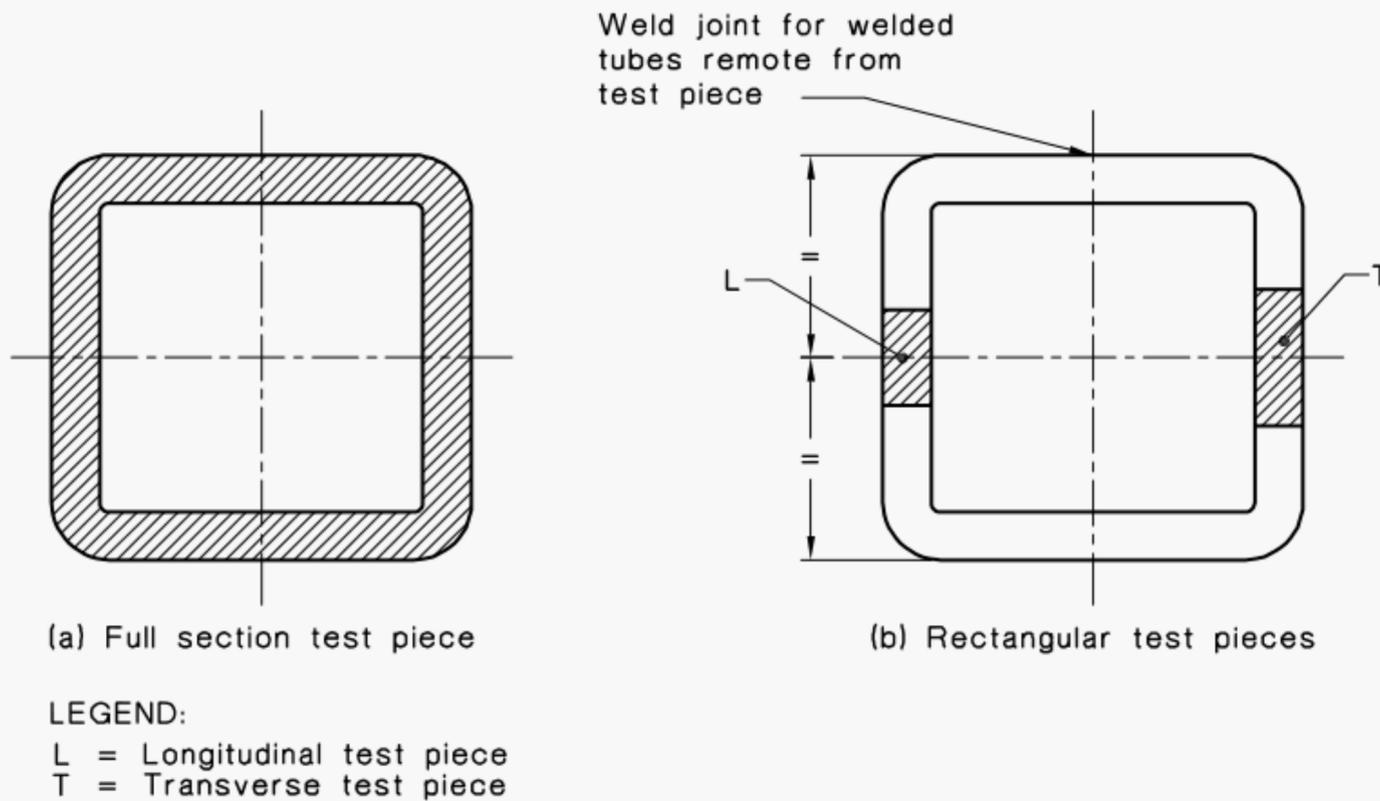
TUBULAR PRODUCTS—LOCATION OF TEST PIECES FOR TENSILE TESTING OF HOLLOW SECTIONS
